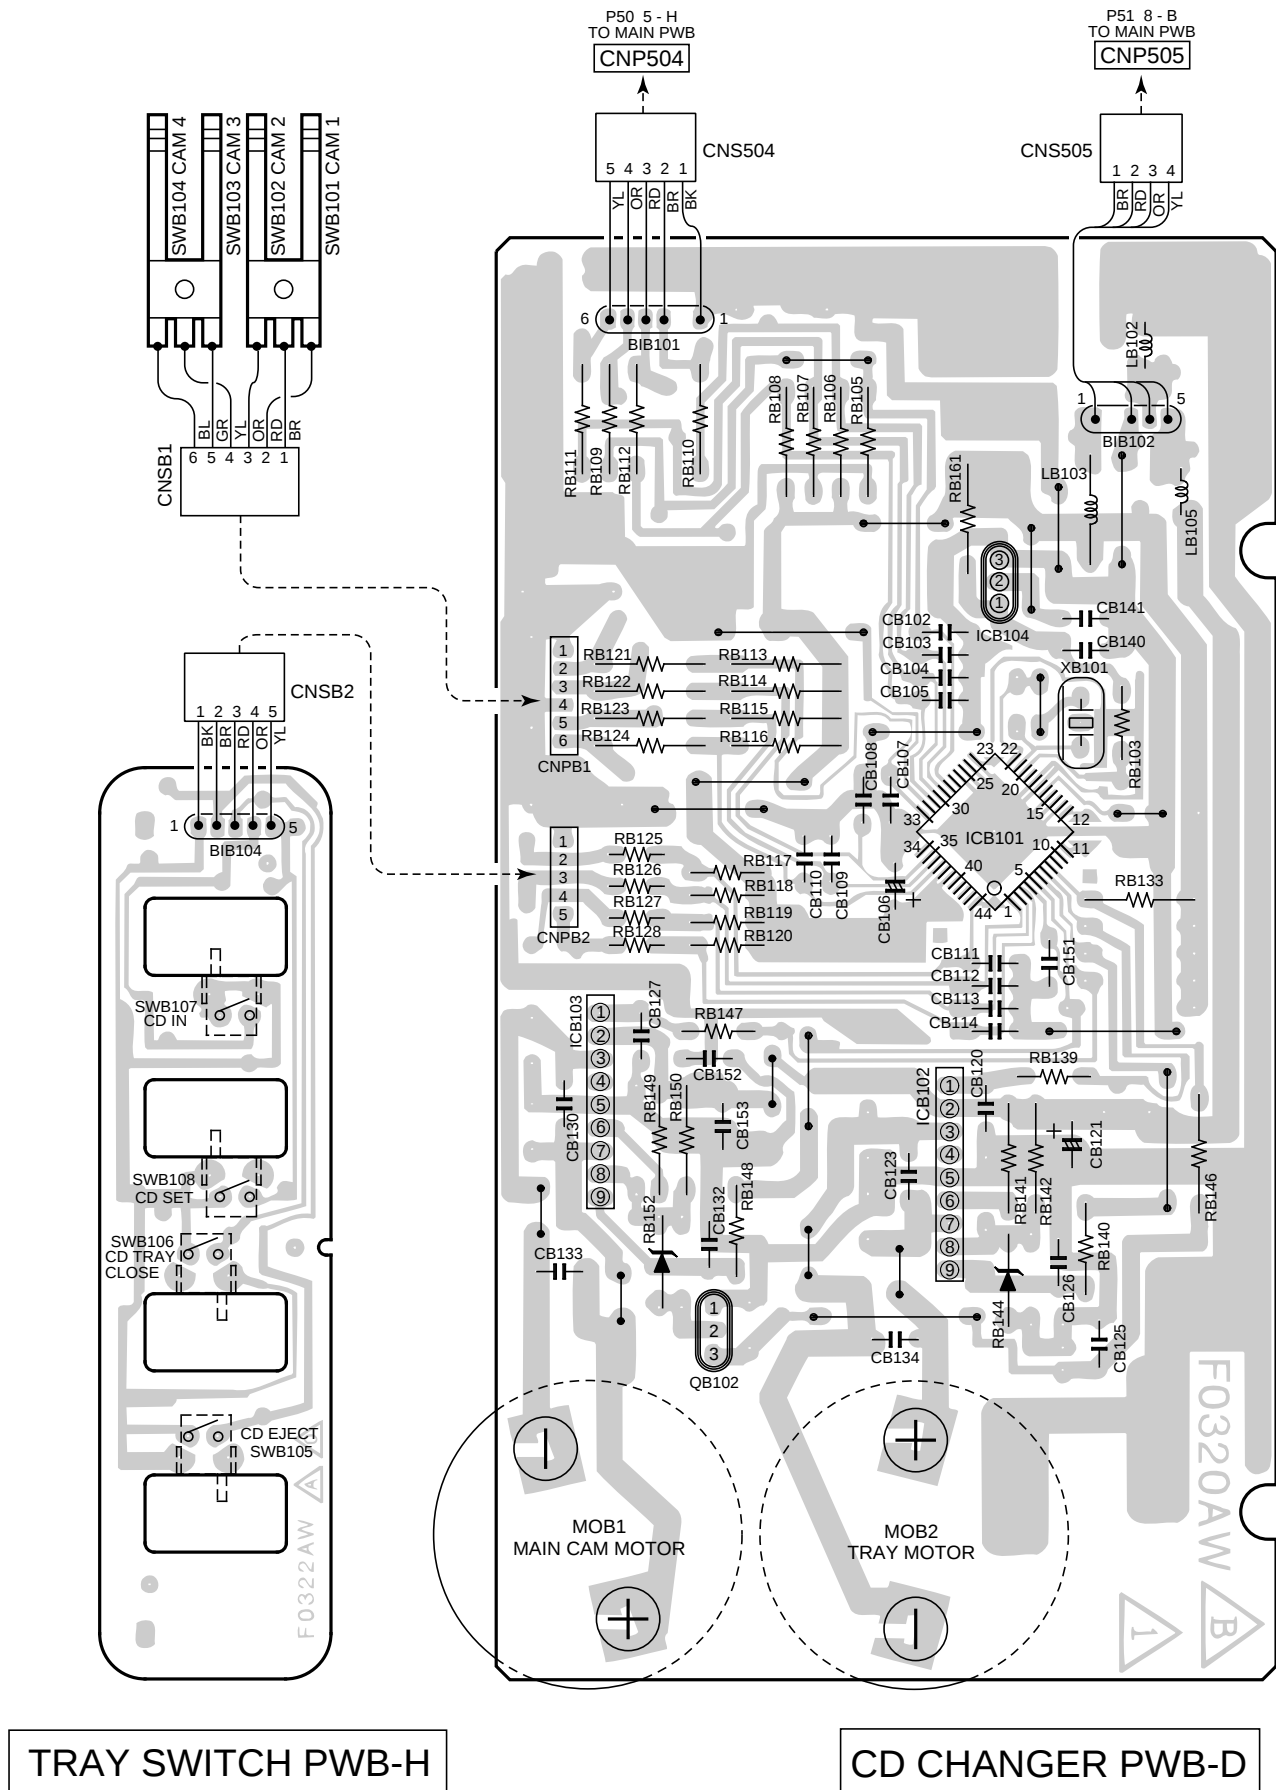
WIRING SIDE OF P.W.BOARD (4/8)
